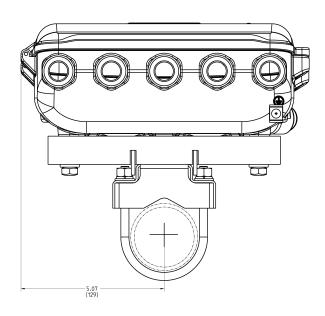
Rosemount 802 Wireless Multi Discrete I/O Transmitter
